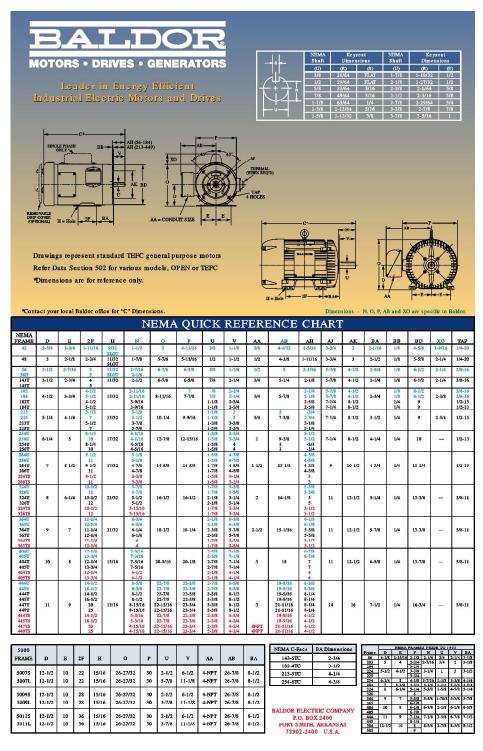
NEMA motor dimension chart (Courtesy of Baldor Electric Company).
